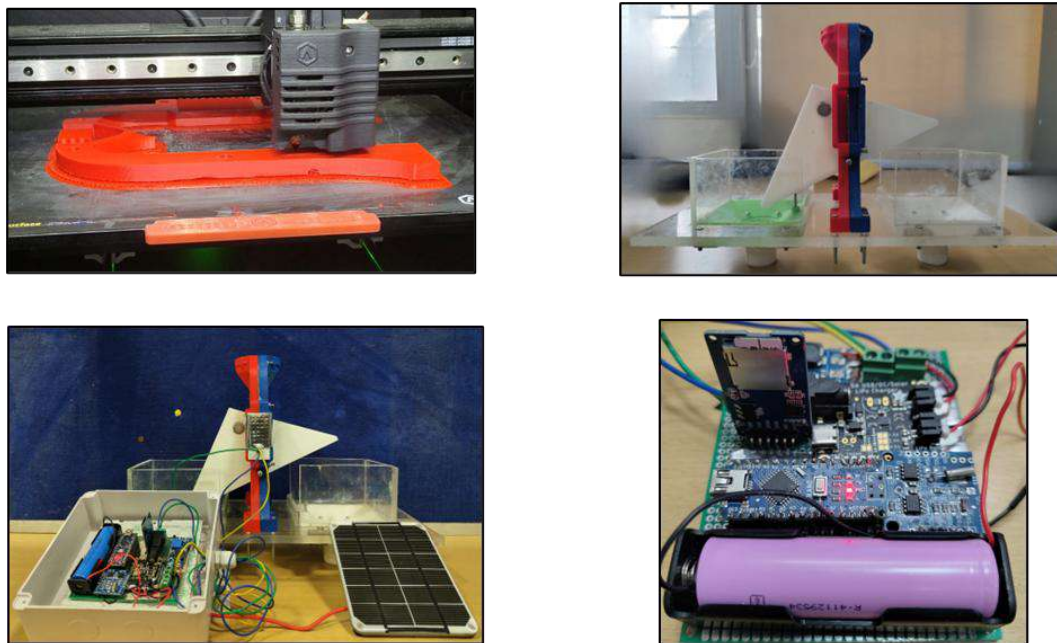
(clockwise from top-left) FDM 3D printing of tipping bucket flow gauge hardware; Completed assembly of the tipping bucket flow gauge physical components; Completed data logger; Completed tipping bucket flow gauge without protective enclosure.
